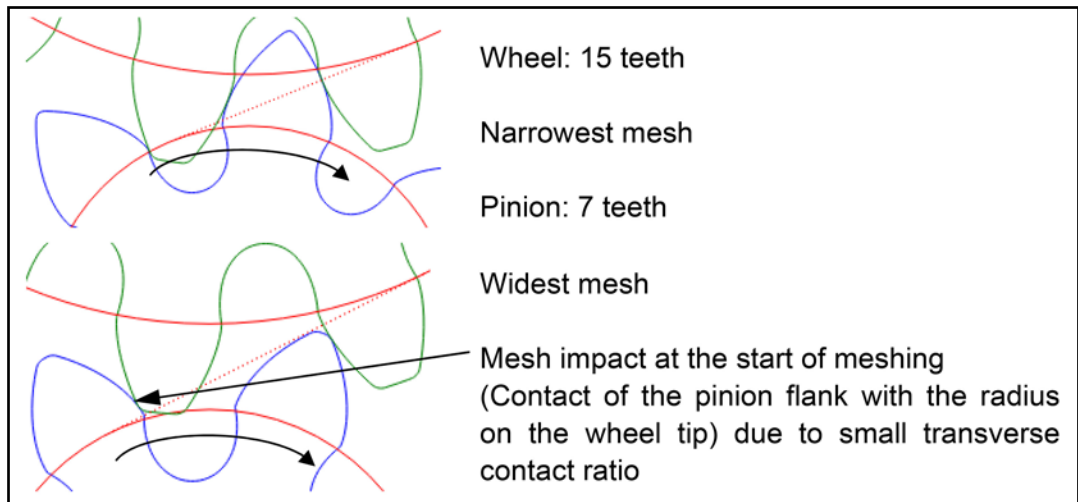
Pinion number of teeth — 7; conventional design — basic rack: similar to DIN 58400 (Ref. 2).
